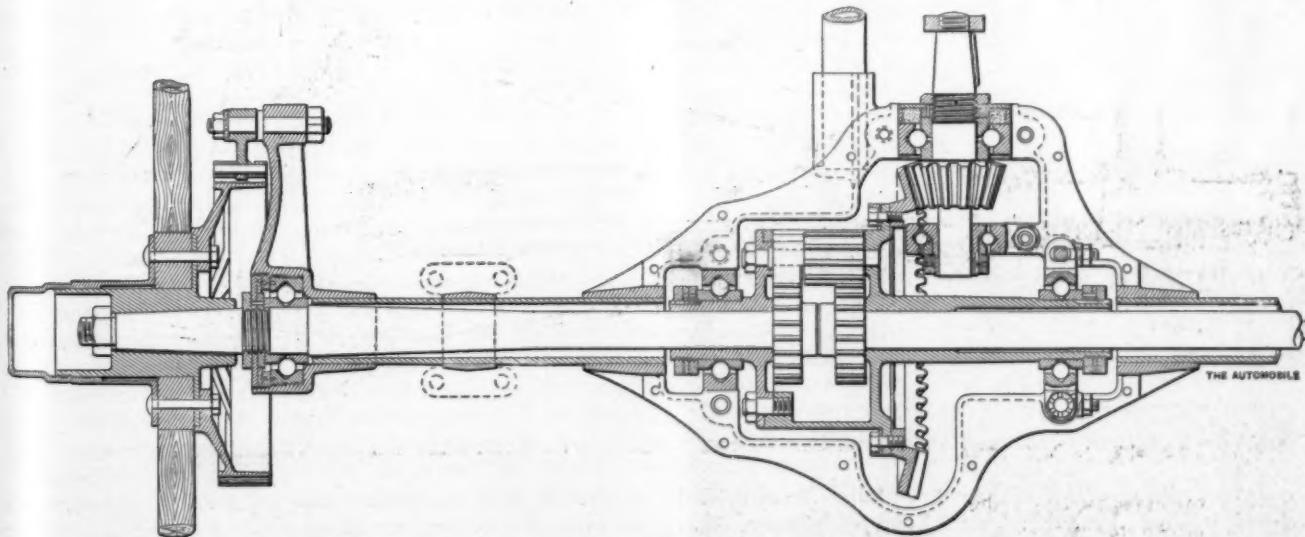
REAR AXLE WITH BALL BEARINGS AND SPUR DIFFERENTIALS. WHEELS ARE KEYED TO ENDS OF LIVE SHAFTS.
